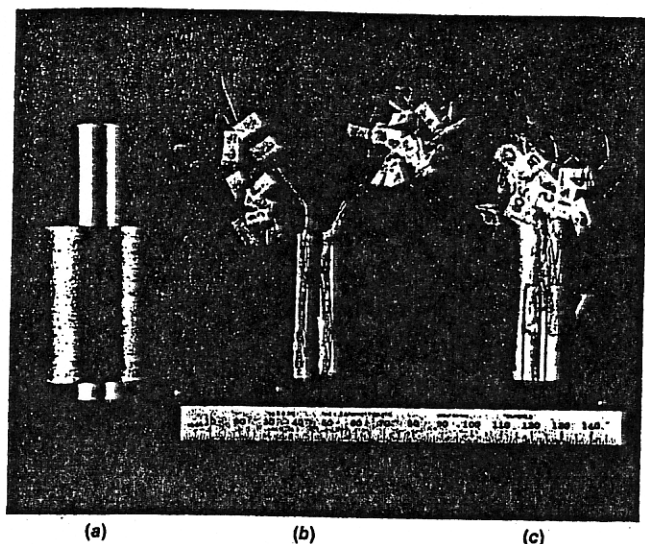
(a) Typical hub, (b) stress-relieved strips ready for measuring gage location, and (c) stress-relieved tube with saw cuts
